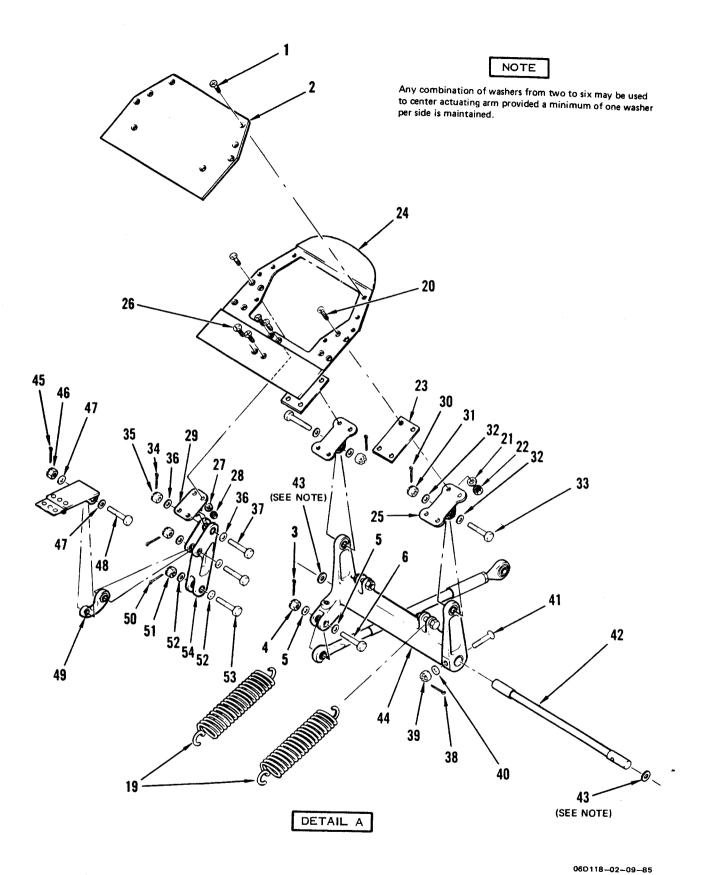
Removal and Installation; Receptacle Cover Assembly (Sheet 2)
